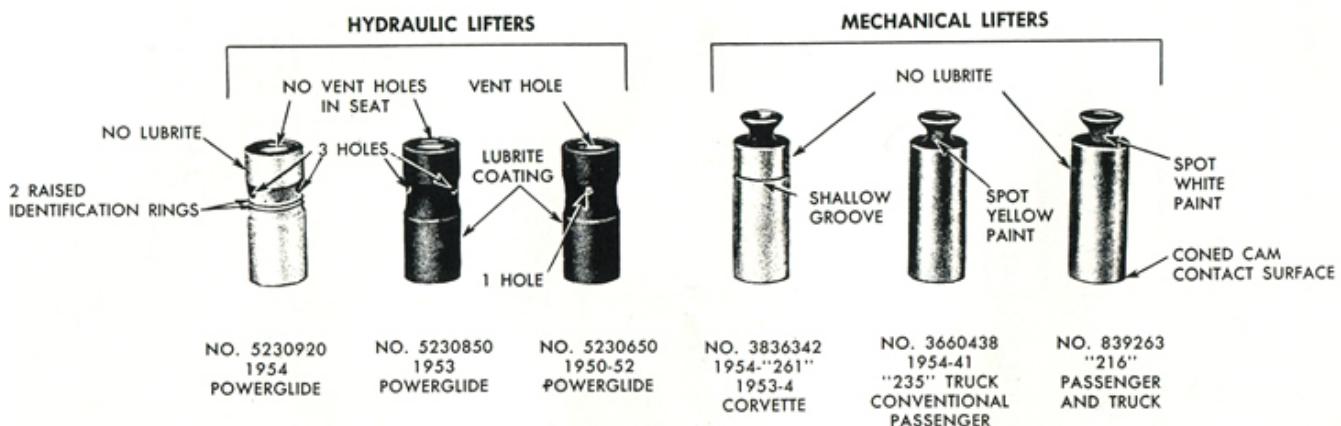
Illustration on page 3 shows part number, identification and usage on valve lifters to be used in Chevrolet Engines 1950-54.
